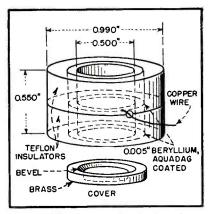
Construction of ionization chamber. This assembly fits into a one-inch brass cylinder with top and bottom covers
